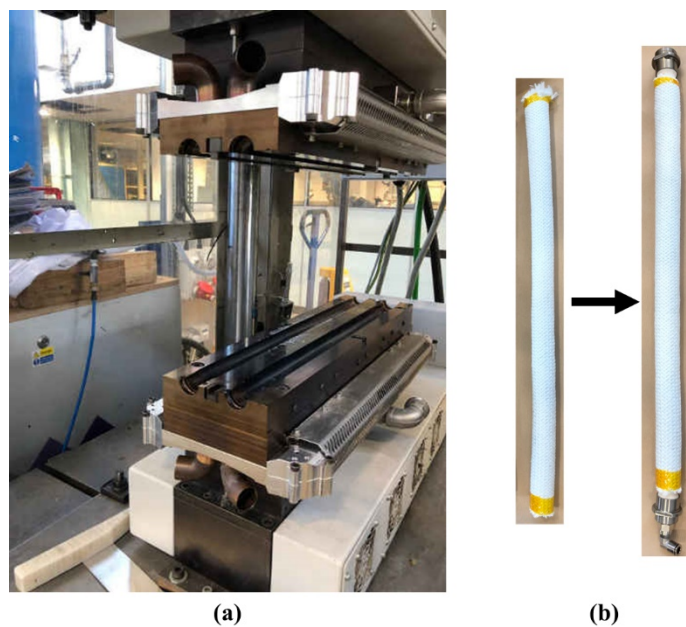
(a) RVM tool used for moulding of braided beams and (b) preparation of bladder-preform assembly from braided fabric
